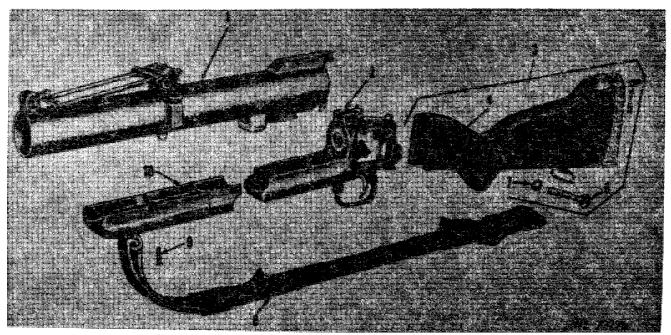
40-mm grenade launcher M79--partial disassembly.
